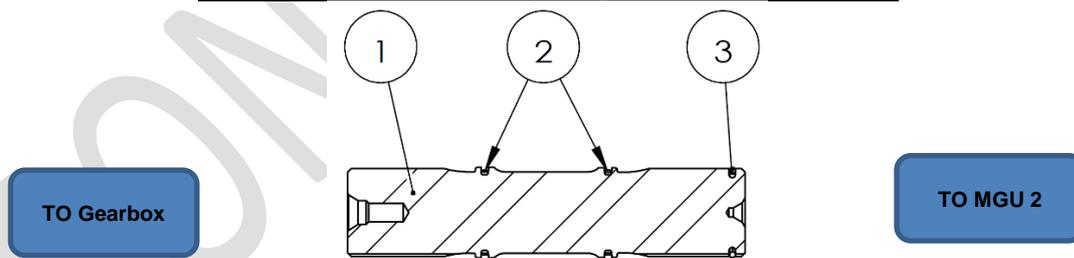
Connecting shaft installation with O-rings and Snap Ring
